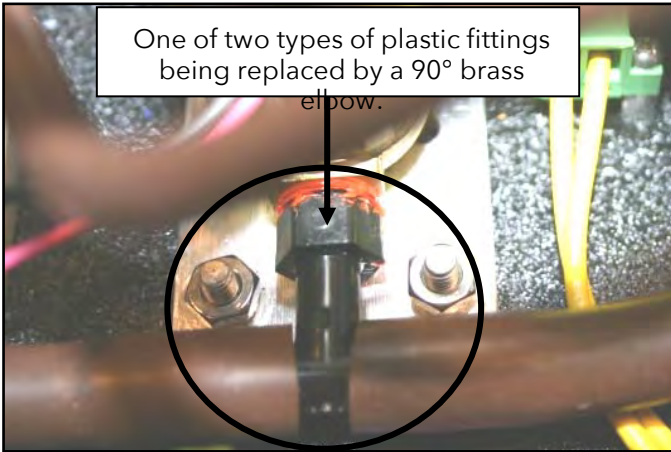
THE ADH NETCOM AUTOMATIC AIR DEHYDRATOR OUTLET SOLENOID MODULES.
